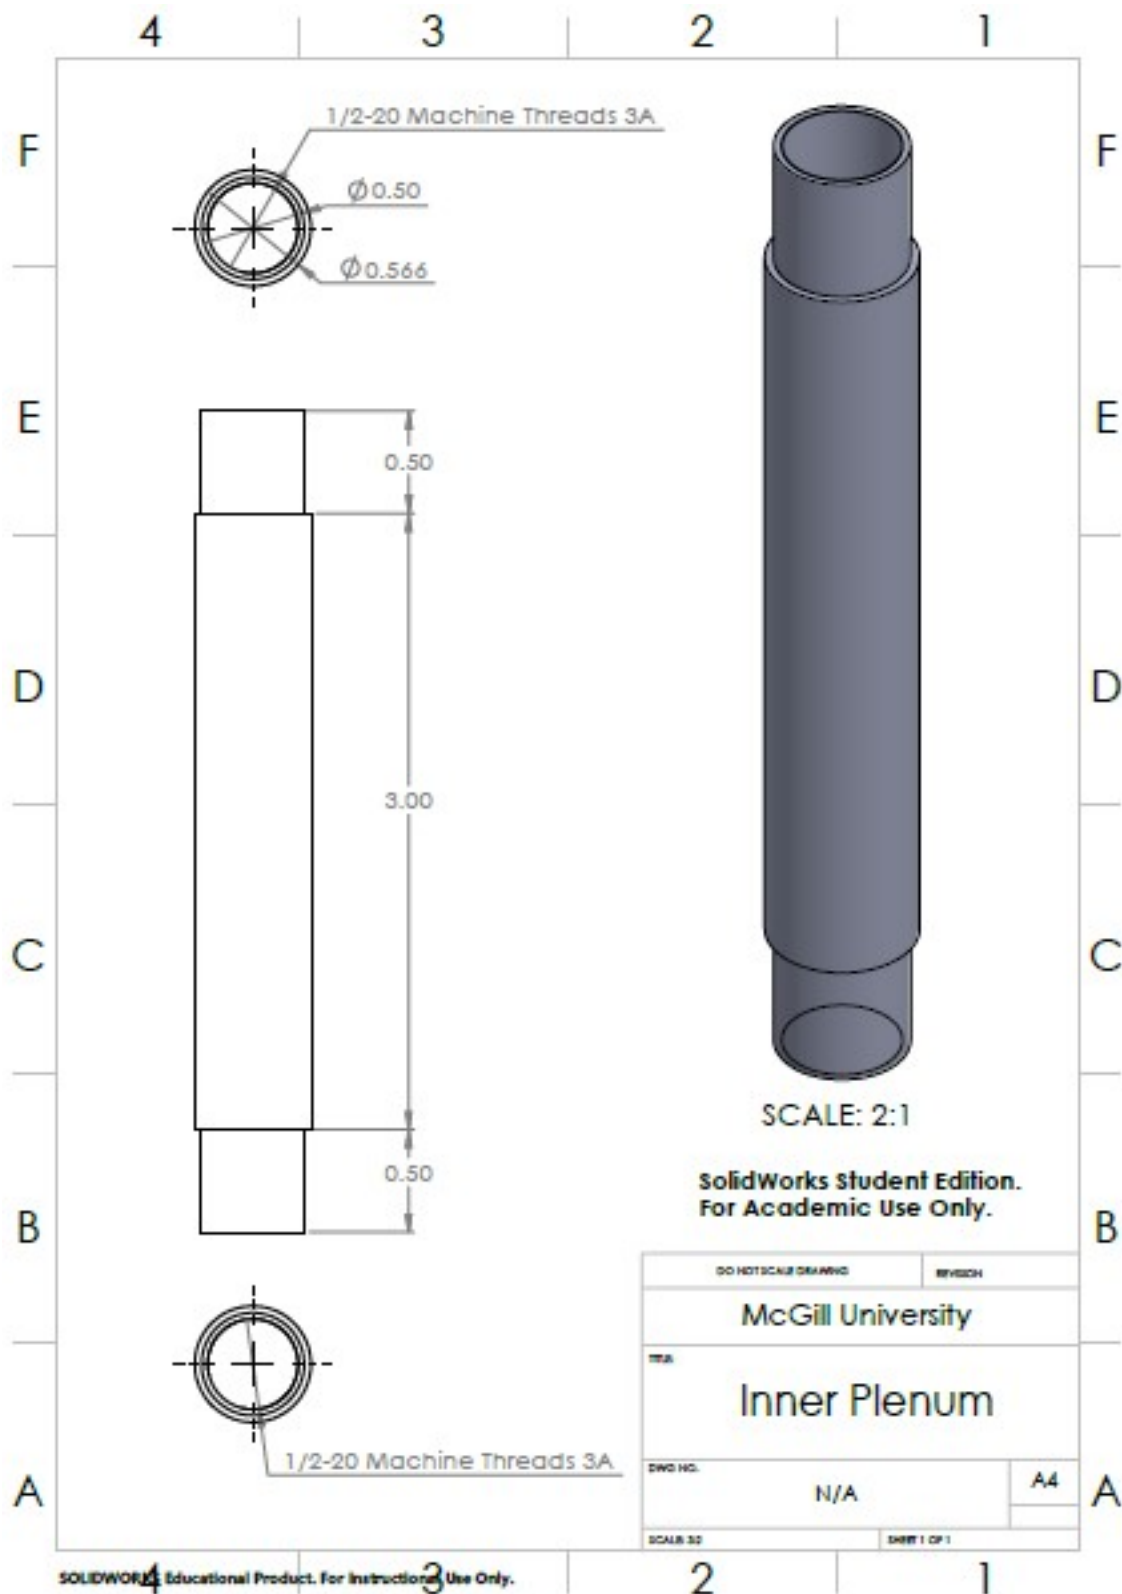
Design drawing of bottom modular piece to inner plenum. Piece fastens under low-swirl injector.
